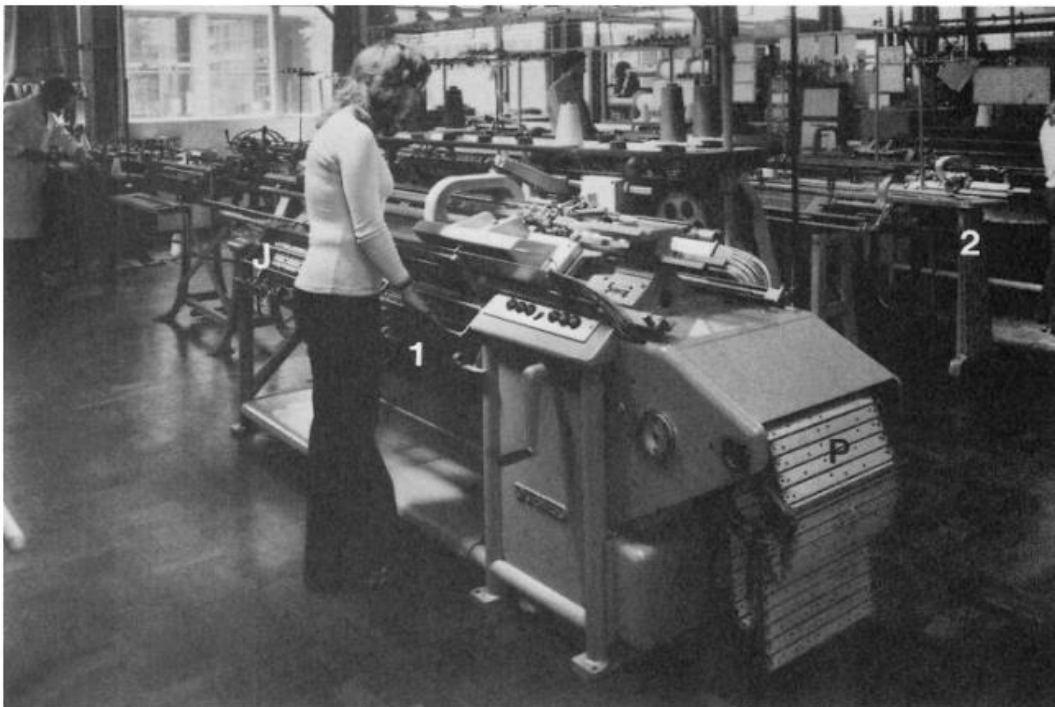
Mechanically controlled flat knitting machines. 1 = jacquard power flat; 2 = hand flat; J = jacquard selection steels; P = paste board movement cards.
